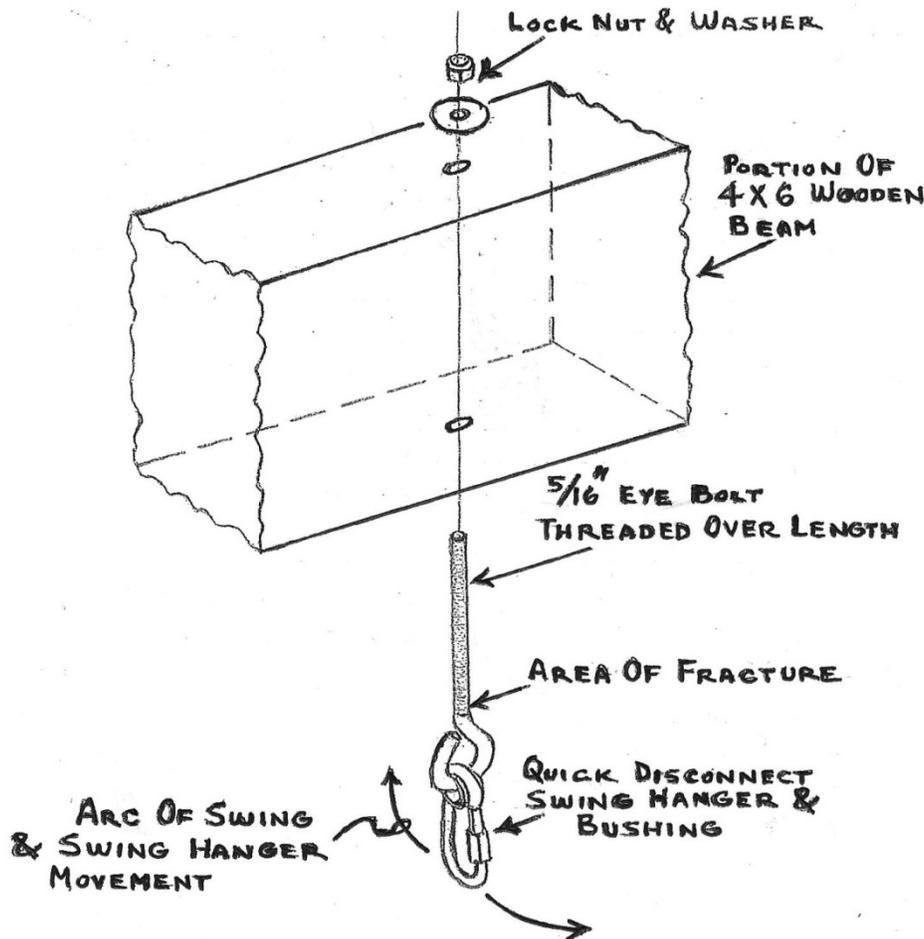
General Assembly of the Swing's Components Near the Area of Fracture
